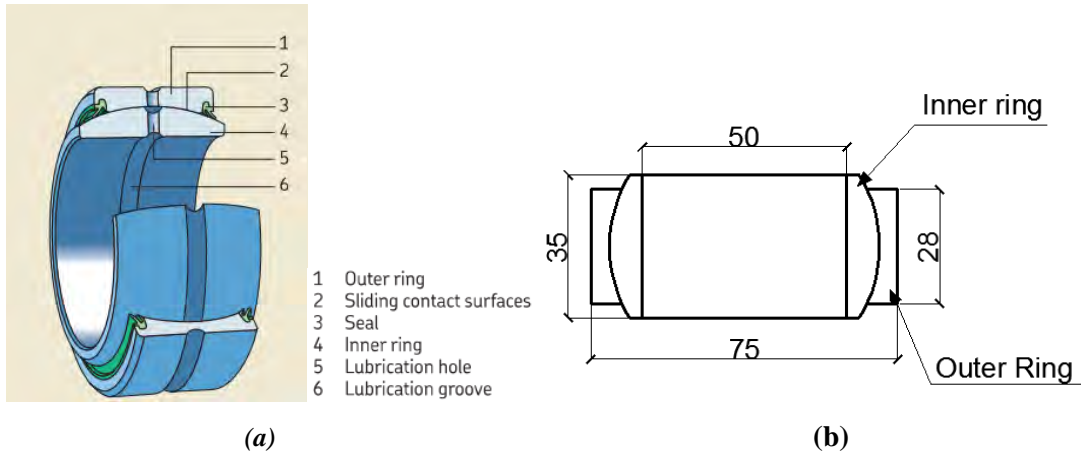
(a) SKF spherical bearing SCF-50ES (2011); (b) Section view of the spherical bearing with dimensions(units: mm)
